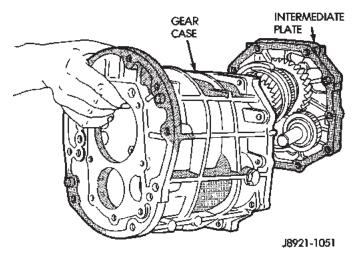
Install Transmission Gear Case to the Intermediate Plate
